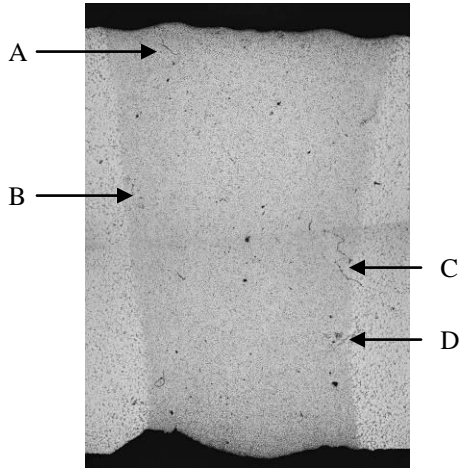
Solidification Cracks in the Sample Welded at 0.5 mm gap – Start Section
